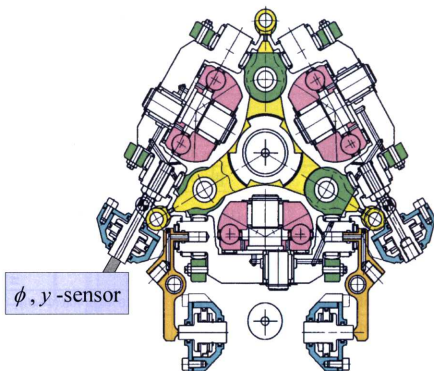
Axial view of 6-power-roller half-toroidal CVT
